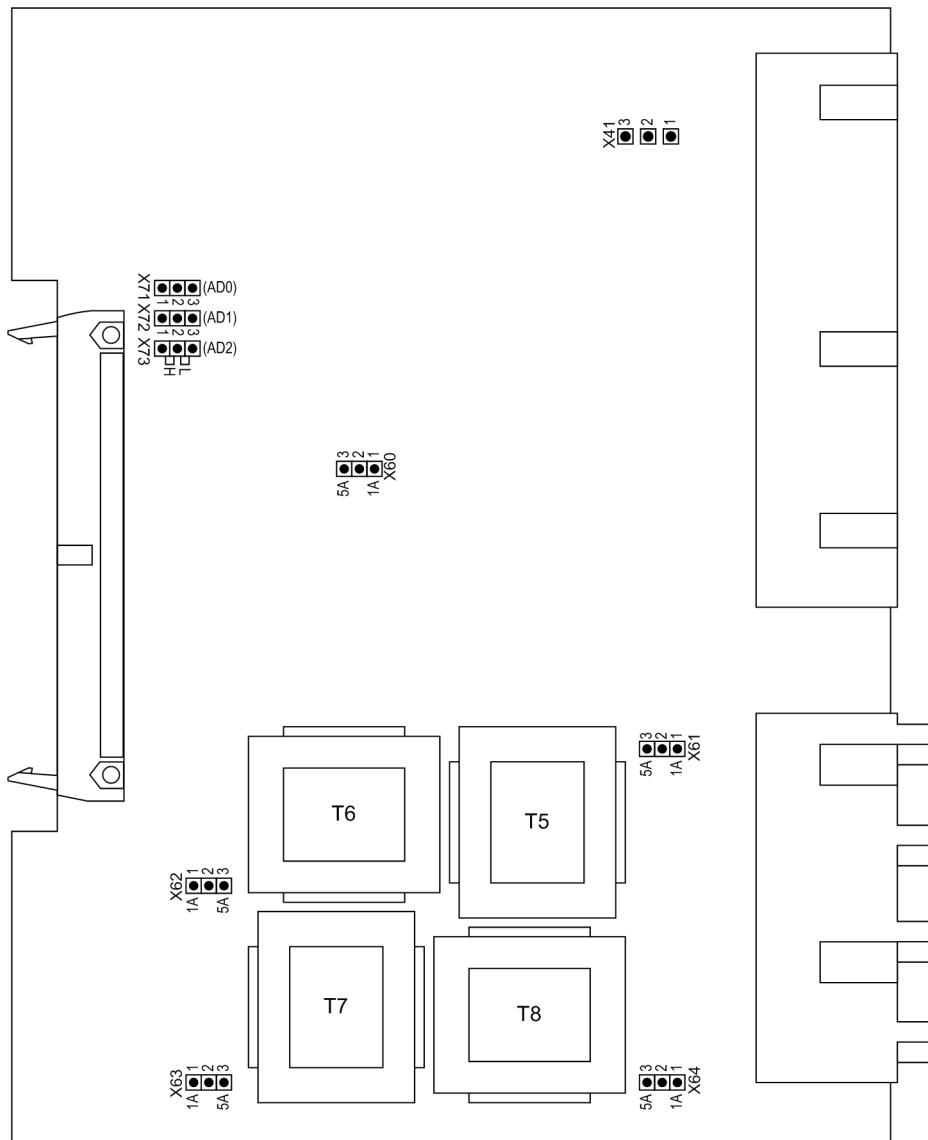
Input/output board C-I/O-2 up to release 7UM62.../DD, with representation of the jumper settings required for checking the configuration settings
